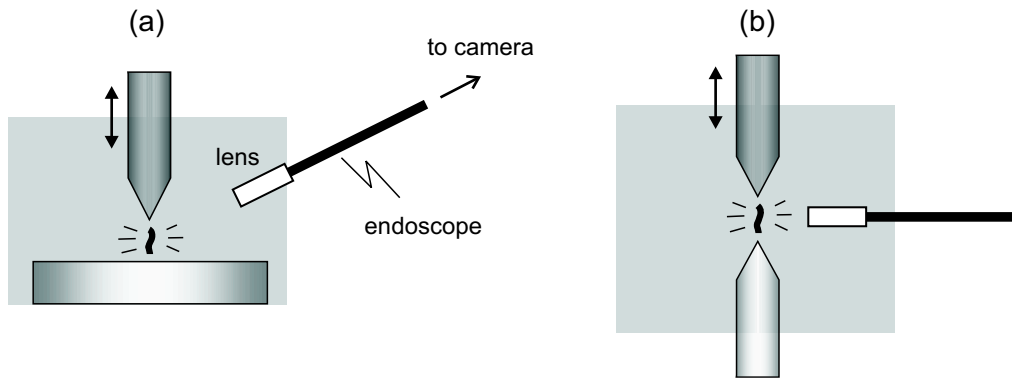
Schematic drawing of the experimental setup for imaging. (a) Imaging of the EDM process; (b) plasma imaging.
